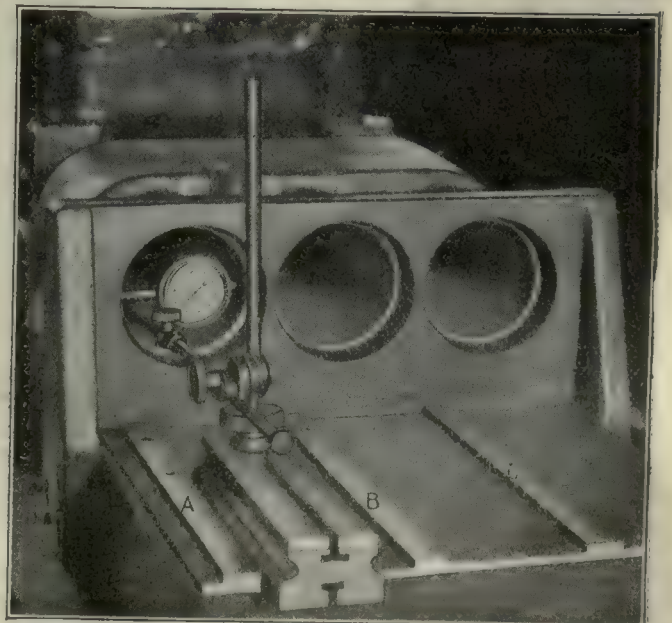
METHOD OF INSPECTING CYLINDER BORE
